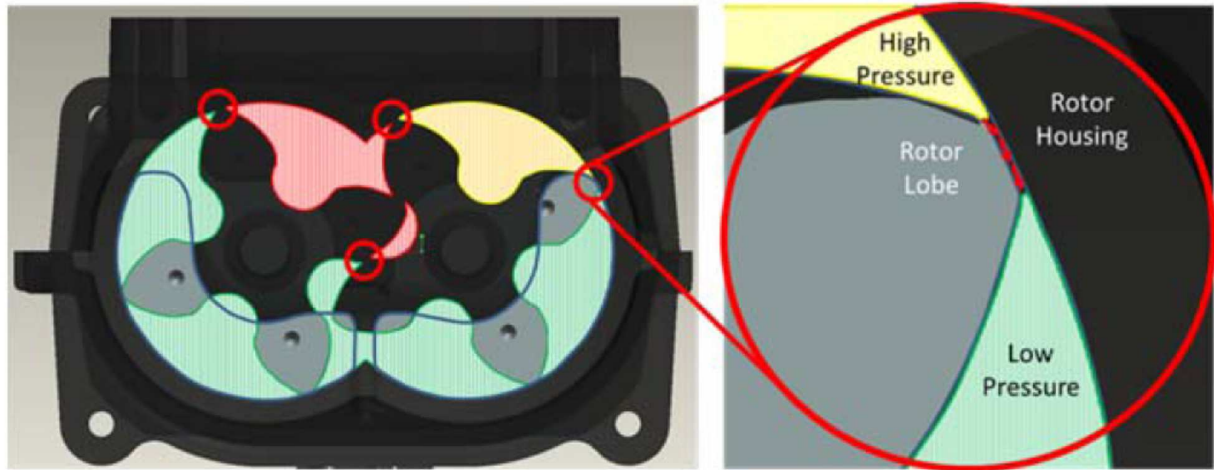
Leakages in Roots-type supercharger caused by clearances between rotor and rotor housing and between meshing rotors [23]
